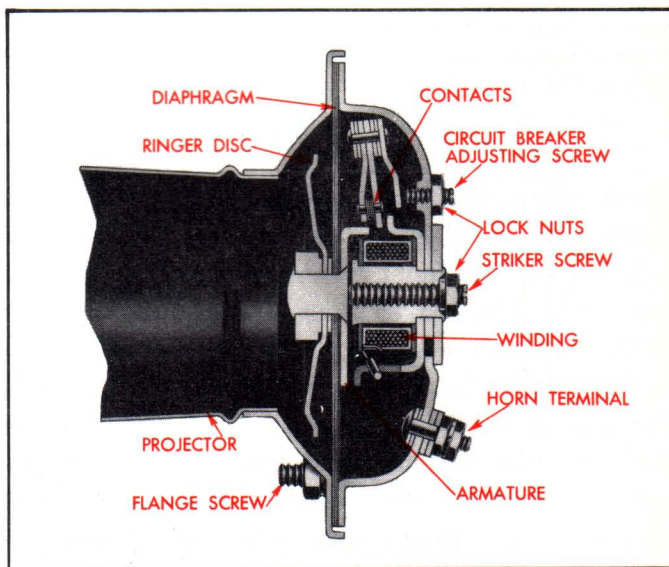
HORN ADJUSTMENTS (TYPES HA, HD, AND HK). To adjust these horns tighten all of the flange screws and back out the striker screw until it no longer contacts the diaphragm assembly.
